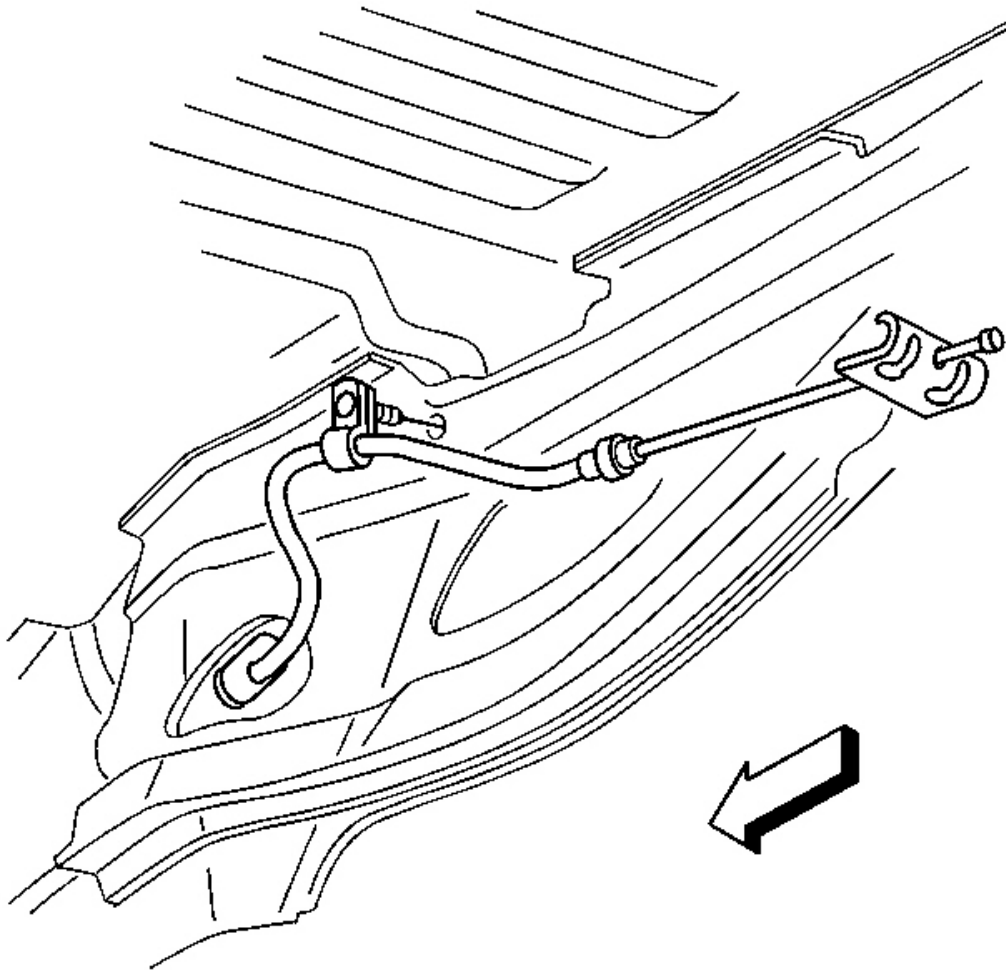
Pass-Through Grommet & Front Bracket To Cable
